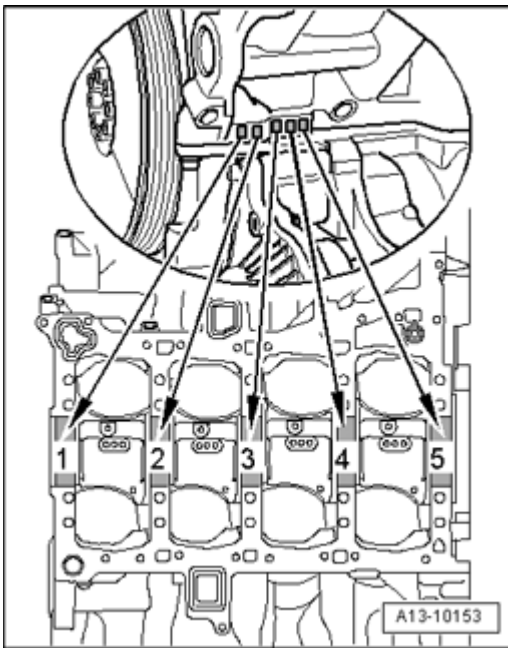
Allocation Of Crankshaft Bearing Shells For Cylinder Block
